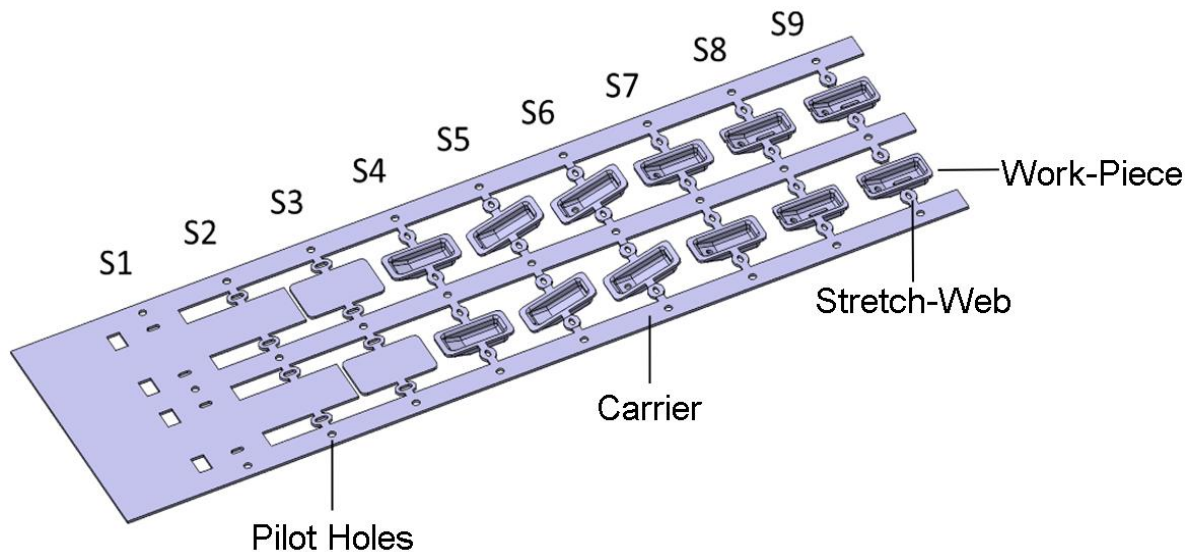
Example of sheet metal strip in a progressive die operation with 9 stages. Stage 1 through 3 are blanking operations that remove unnecessary sections of the sheet metal. Stage 4 is a cup forming operation. Stage 5 through 7 rotate the part to coin a hole in the wall of the cup and subsequently rotate the cup back to its original configuration. Stage 8 embosses a bead in the bottom of the cup. Finally, stage 9 crops/shears the cup from the rest of the strip [13].
